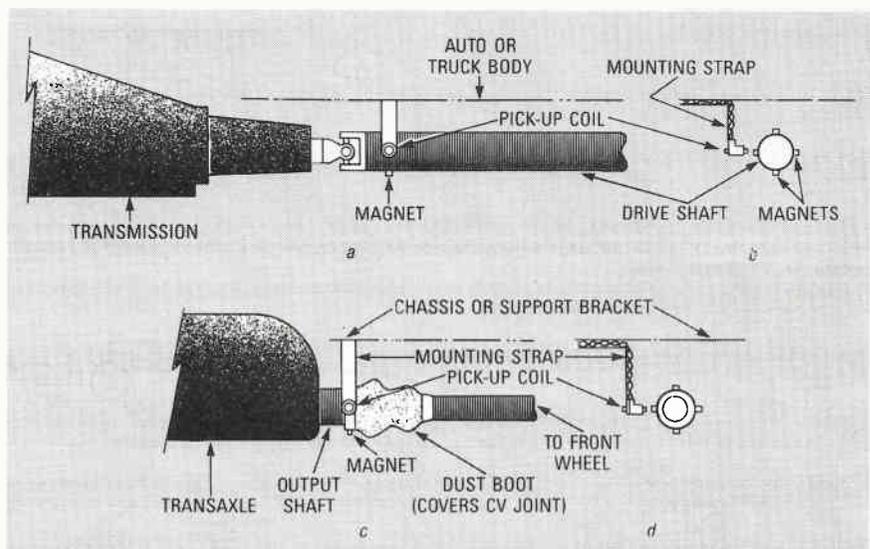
MAGNET AND PICKUP-COIL MOUNTING METHODS: For a car with a transmission and driveshaft, mount the magnets and pickup coil as shown in a and b, respectively. For a car with front-wheel drive, mount those parts as shown in c and d.
